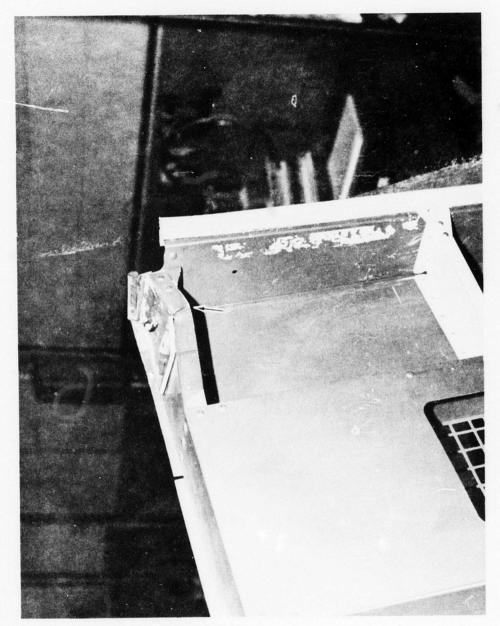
Main Rotor Pylon, Redesign, Alignment Pin Mount Damage.
